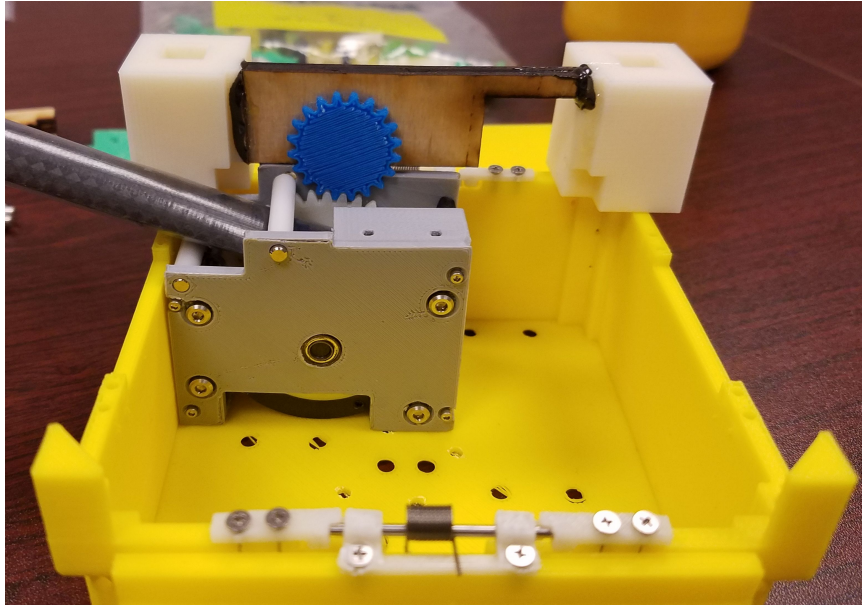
Gear winding assembly mounted on the payload frame interfacing with the boom deployer.
